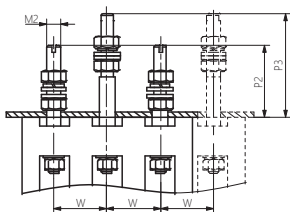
NXMS-160/250 back-panel wiring outline and installation size
